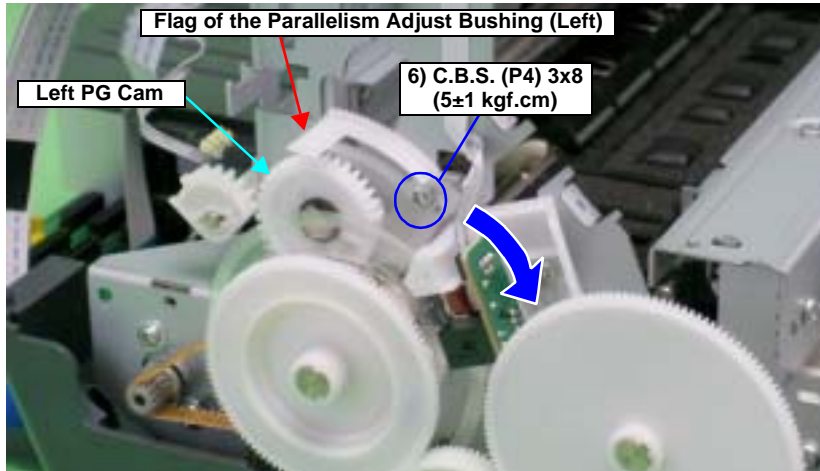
Rotating the Left Parallelism Adjust Bushing
